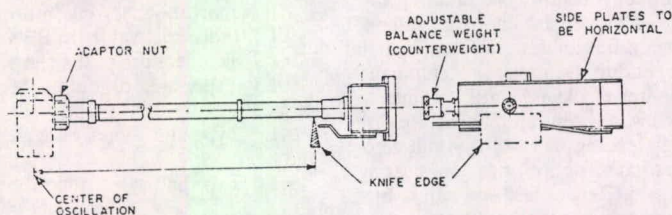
Pendulum Assembly Showing Location of the Point of Balance
